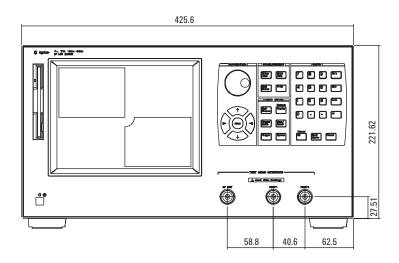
Main unit dimensions (front view, in millimeters, typical)
